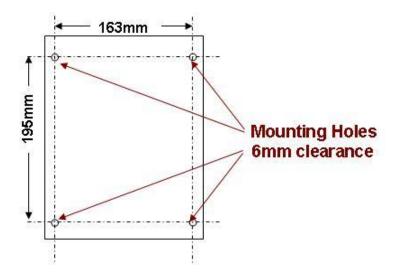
HiperMAX-micro SCRT connection mounting plate design
